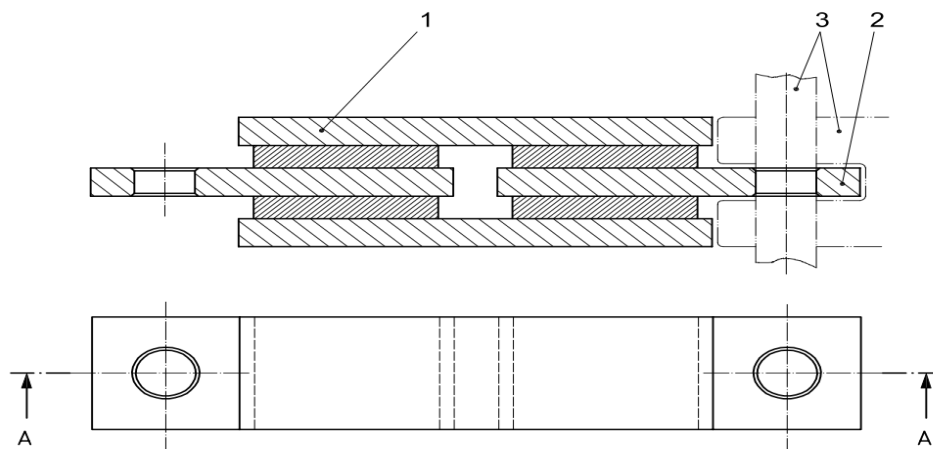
Typical test piece arrangement – ISO 1827 (1: two external plates, 2: two internal plates, 3: pin and fixture for tensile loading) [73].
